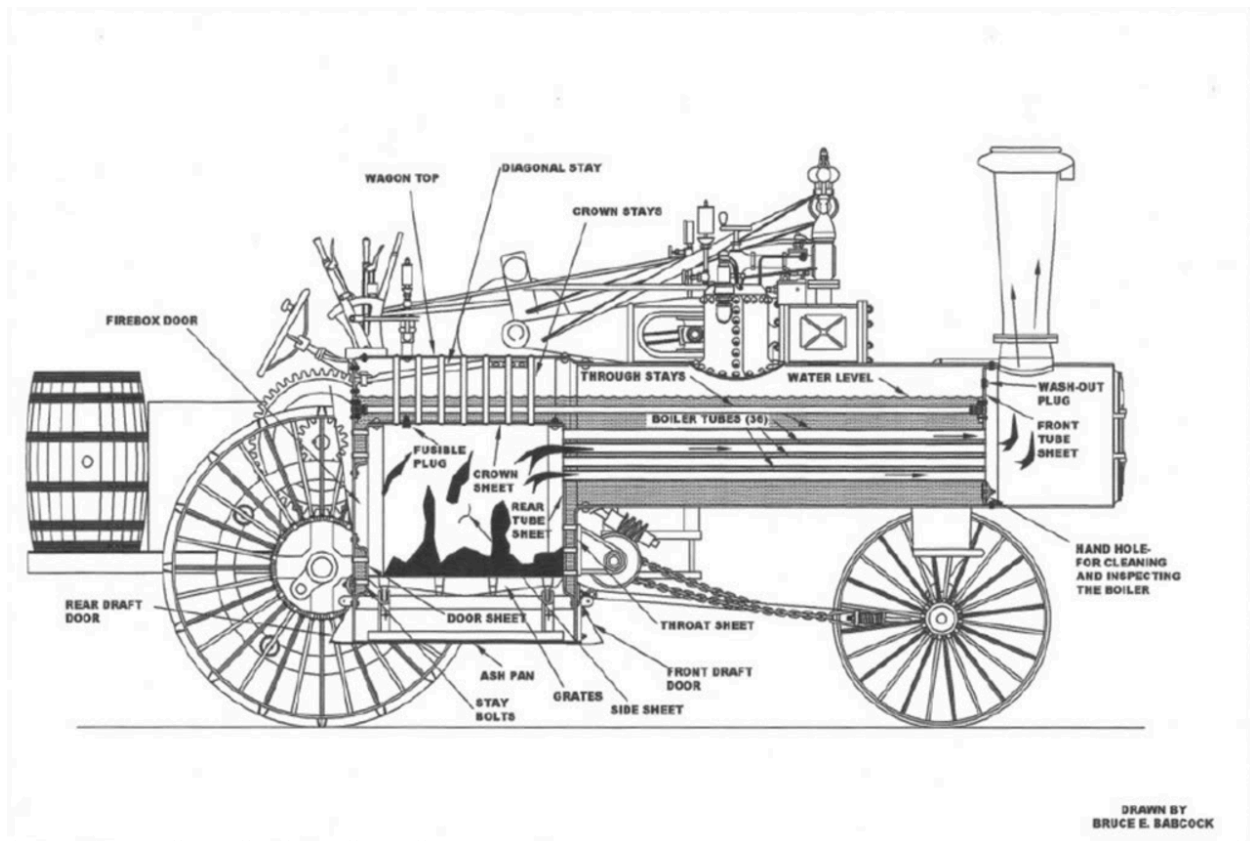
Principal parts of a locomotive-style firetube boiler.
